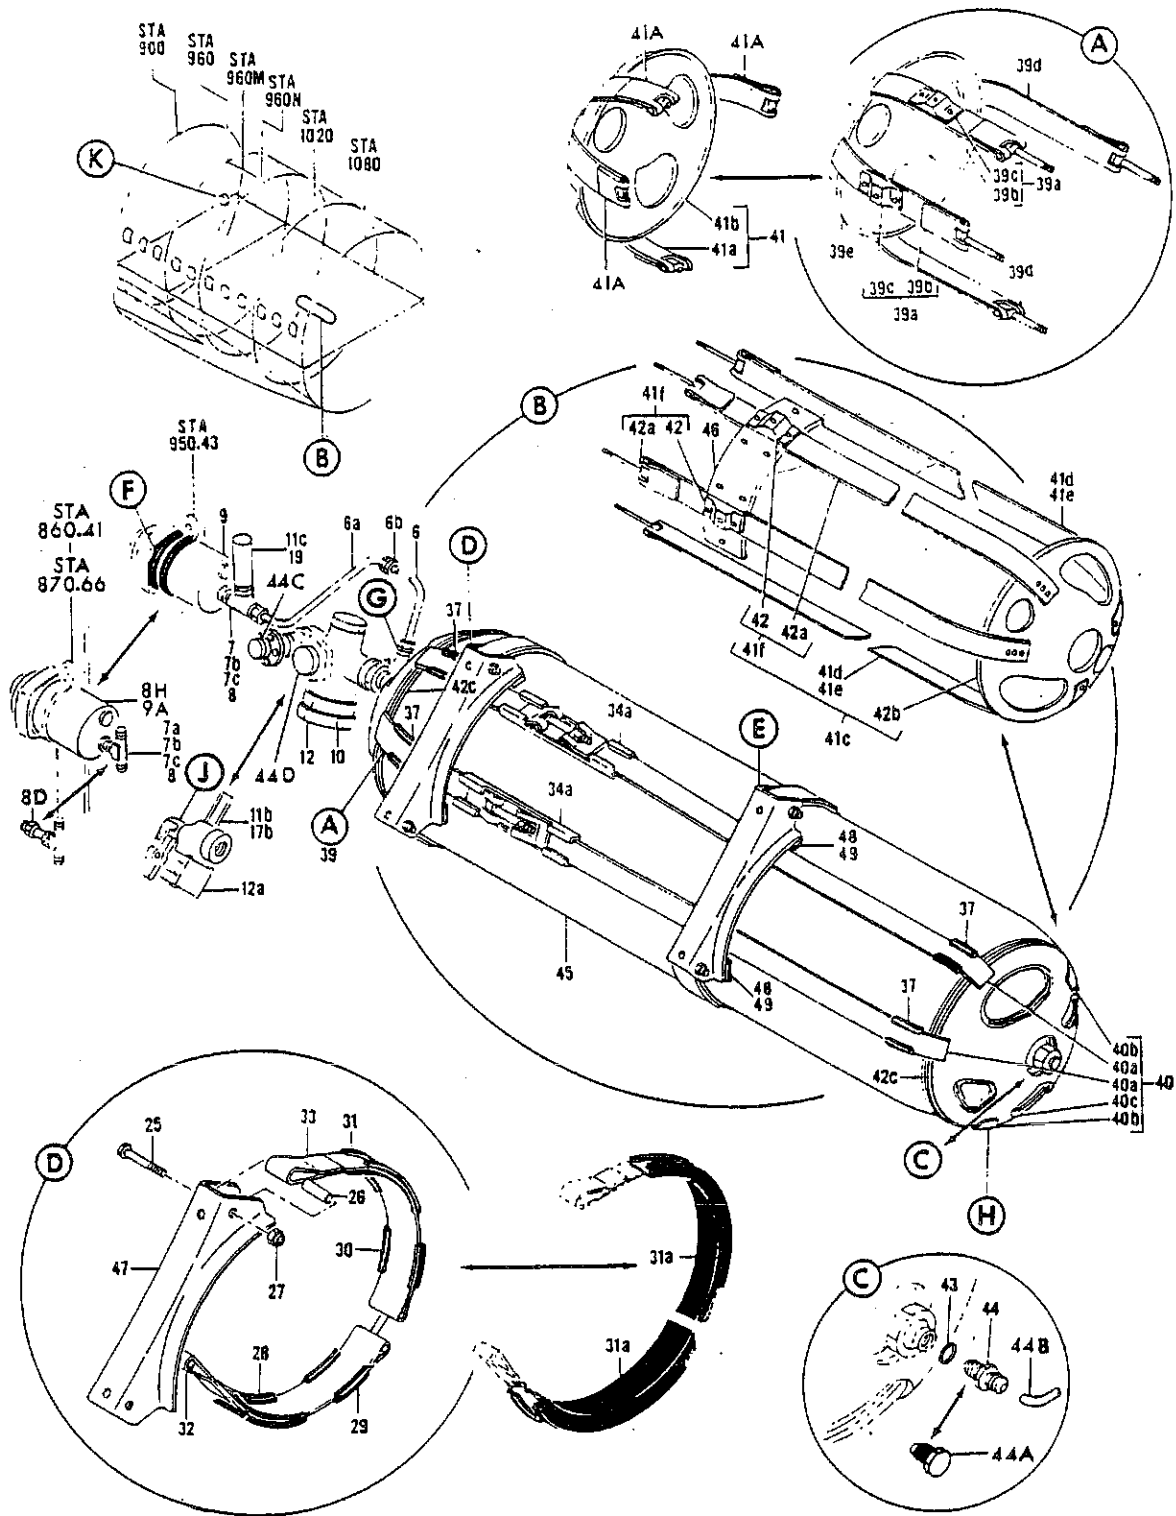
BOTTLE INSTL, ENGINE STARTER AIR RH (SHEET 1)
